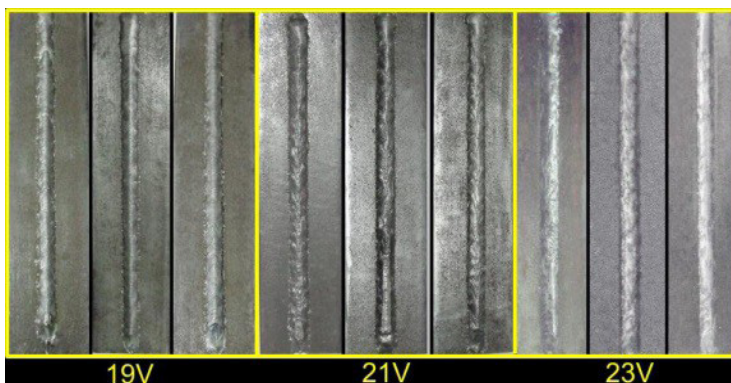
Weld beads resulting from the process with 100%CO2 shielding gas.
